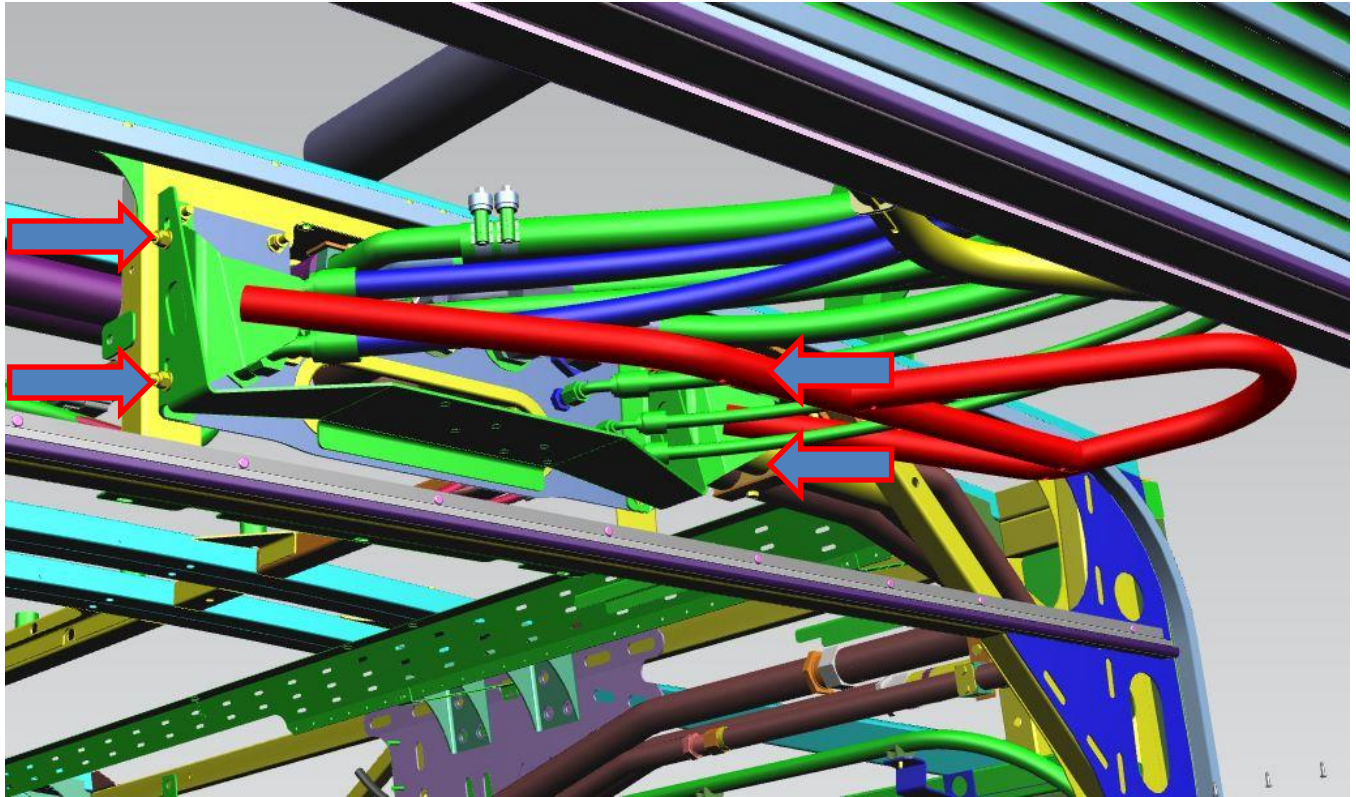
VIEW OF BRACKET TO BE DISCONNECTED AND SET OFF TO THE SIDE
